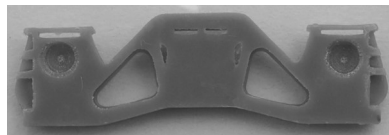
Flash has been trimmed from the sideframe casting and holes have been drilled to clear the waisted bearings that protrude from the frame.
